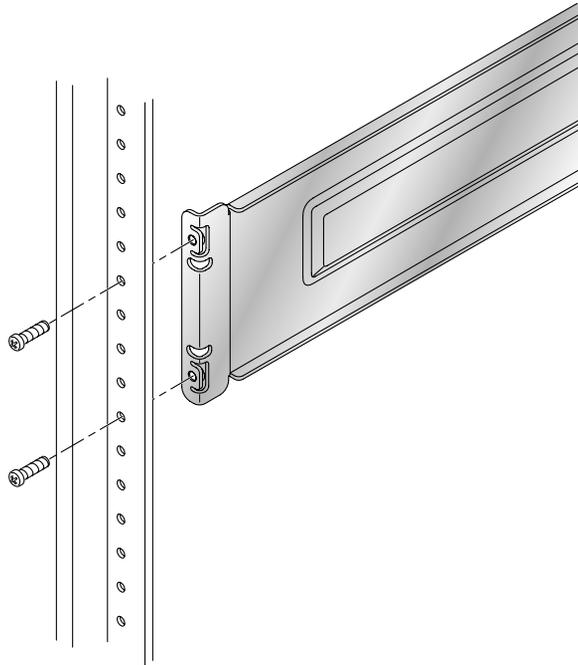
Attach the Front Bracket of the Side Rail Behind the Mounting Rail.
